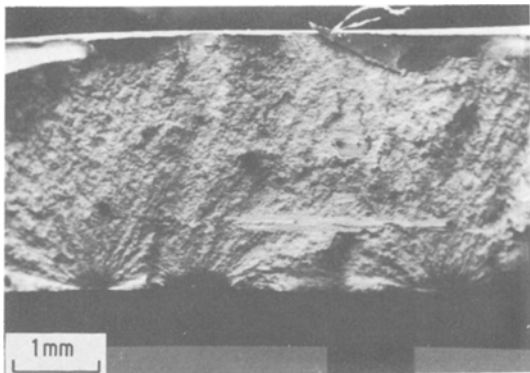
Multiple crack initiation sites along a pipe die spider weld line.
